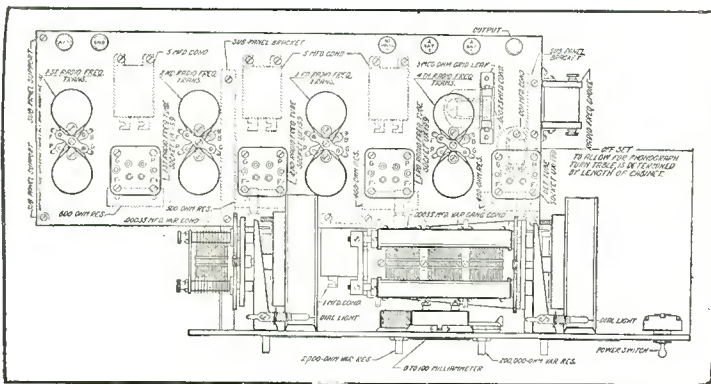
In the above sub-panel layout may be seen the method of assembling all parts used in the Bodine Twin Eight A.C. receiver. The space shown at the left of the drawing represents an offset, which must be provided for in order to allow the panel to be centered
